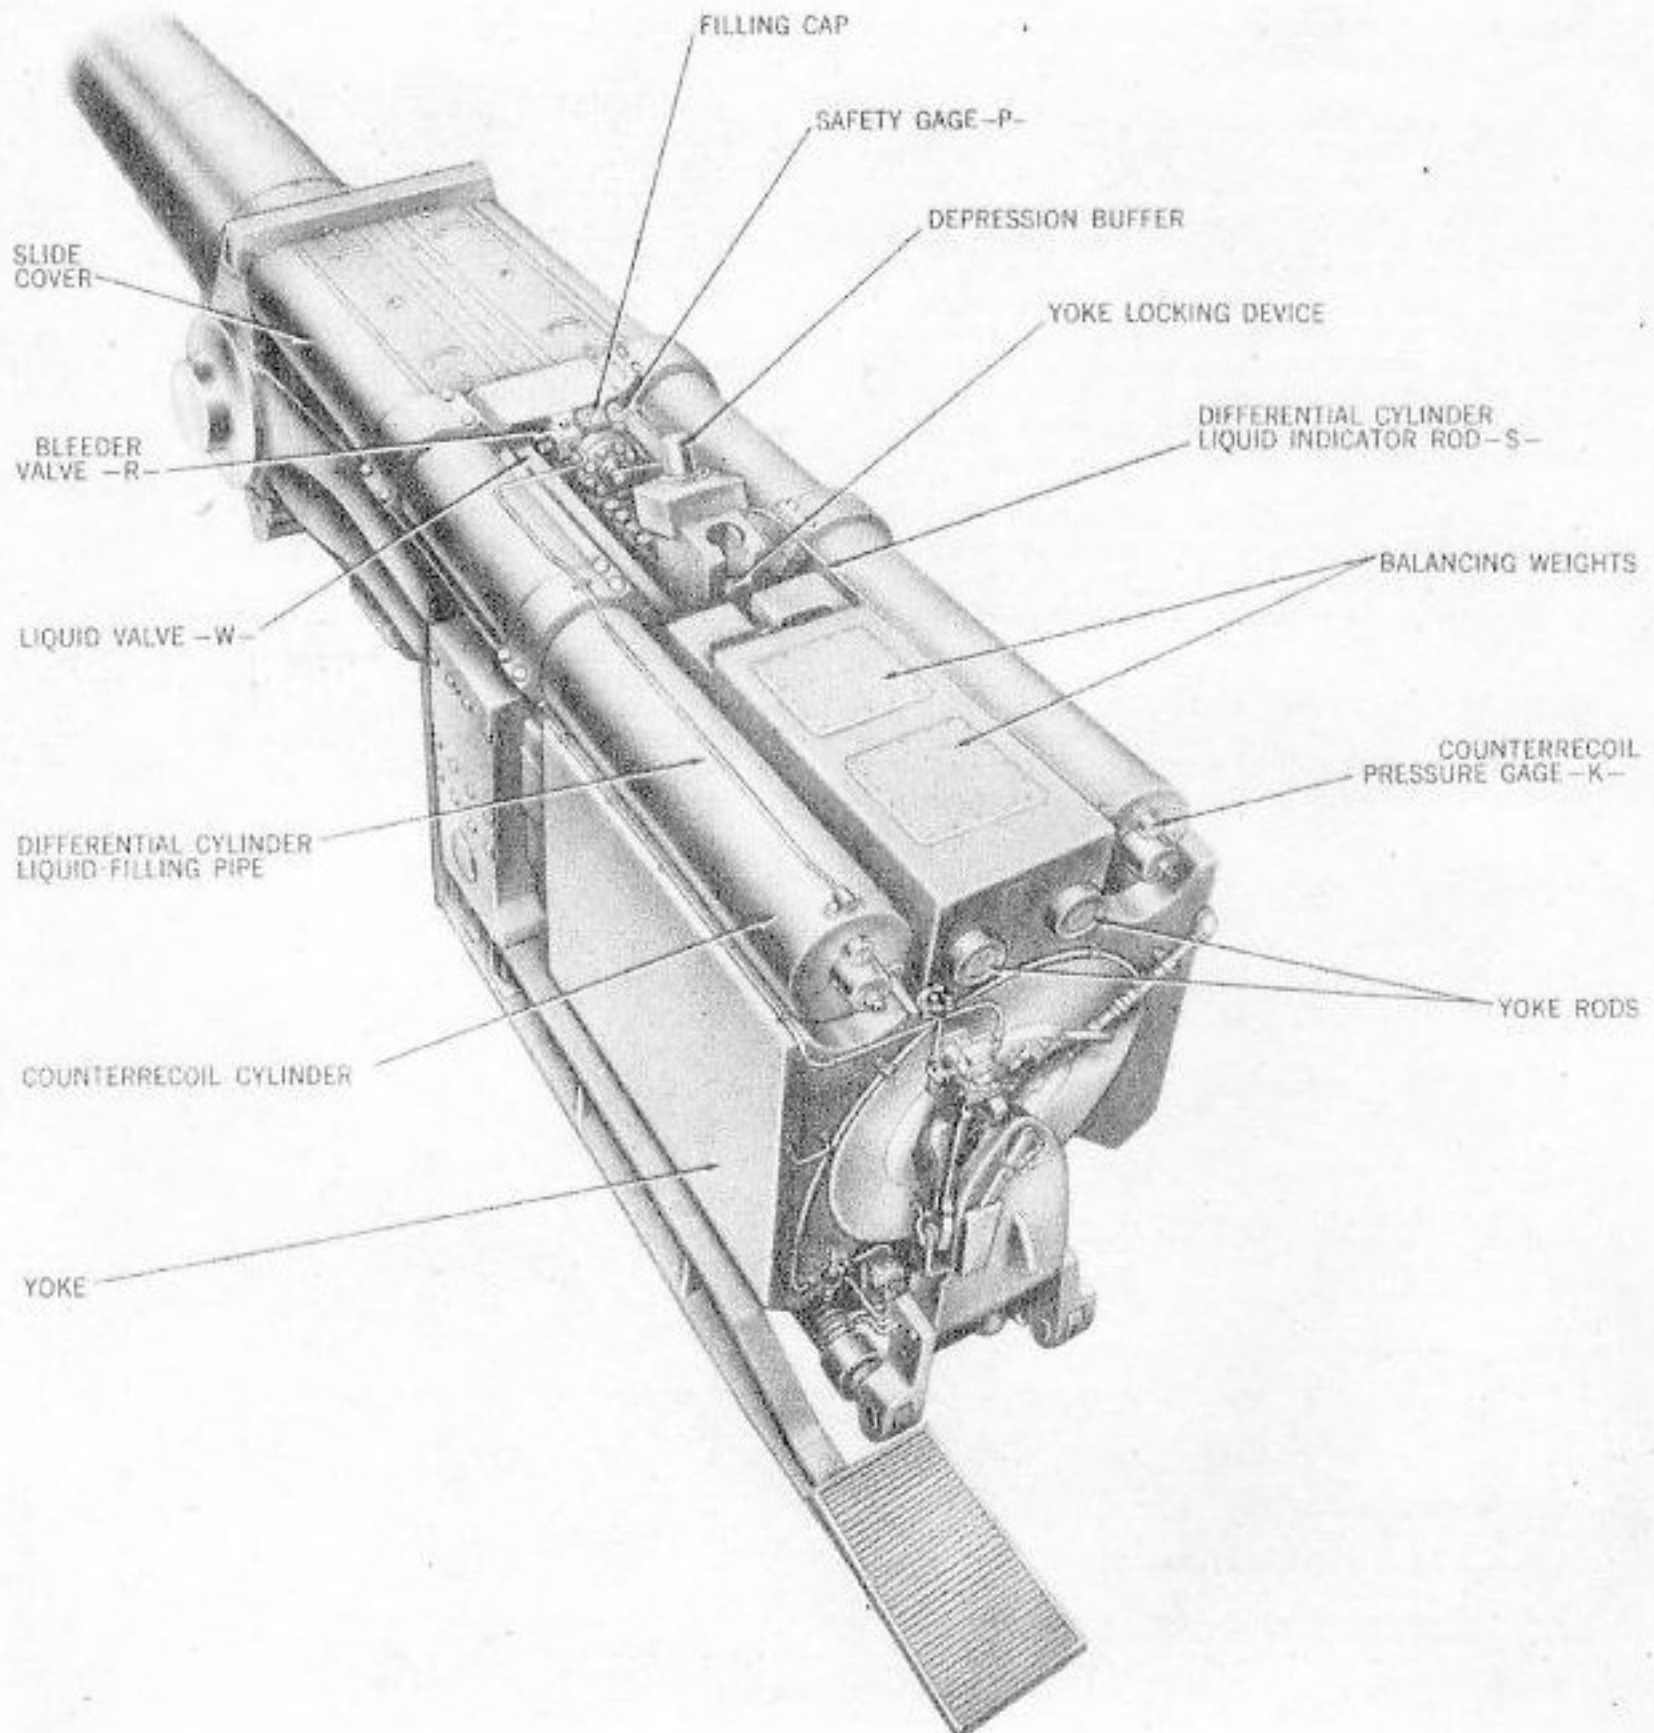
16-inch Gun Mk 7 Mod 0 and 16-inch Slide Mk 6 Mod 0 Assembled
